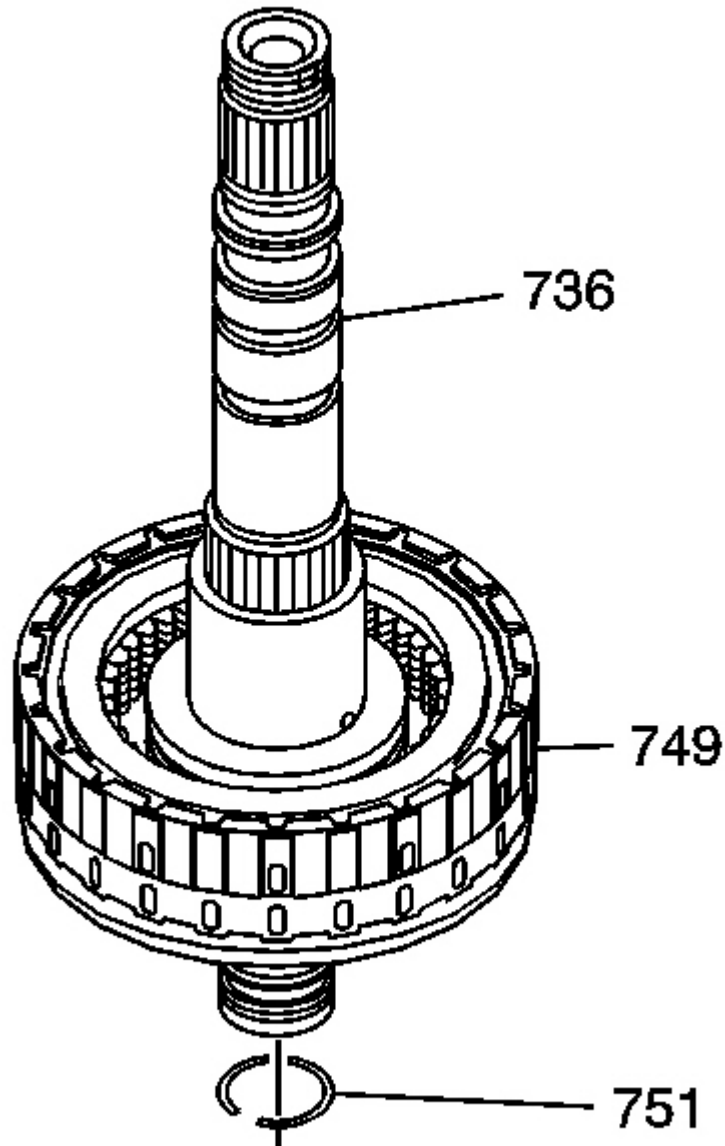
2nd Clutch Housing Assembly, Retaining Ring & 1st/2nd Clutch Shaft
